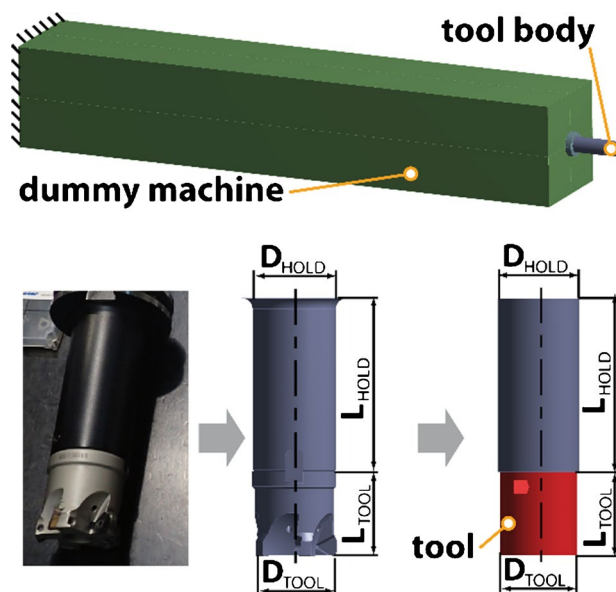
Schematic view of a machine-holder-tool assembly with interface plane and interface point 4 used for coupling the FE beam representation of tool body (holder-tool subassembly)
